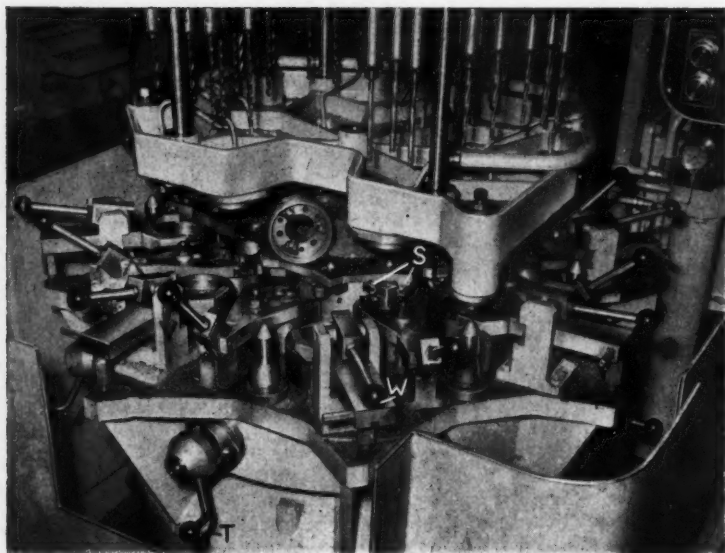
Close-up view of the fixtures and tooling on the Archdale multi-spindle machine employed for drilling, reaming, chamfering and spot-facing operations on the nine rivet and pinion-shaft holes in the rear drum
